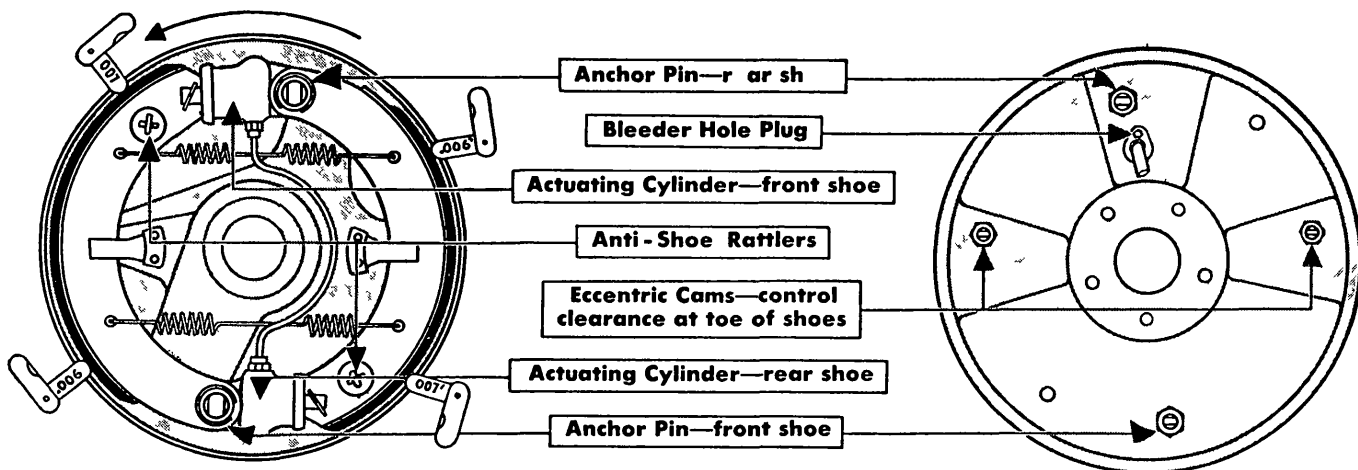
Lockheed hydraulic brake with two single piston cylinders and two eccentric anchor pins. Diagram shows left front brake. Rear brakes are type shown in Fig. 51
